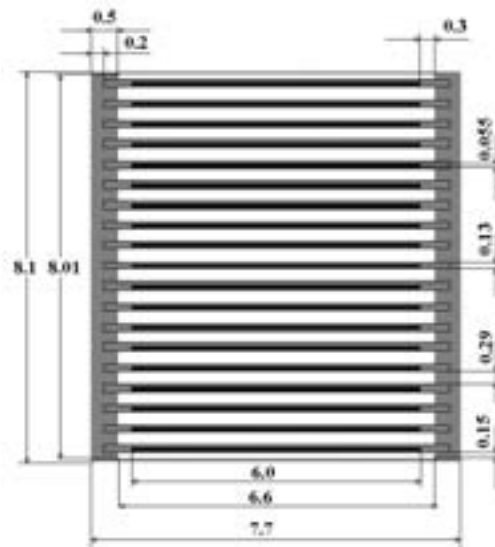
Test P04 fuel assembly. Dimensions are in cm.
